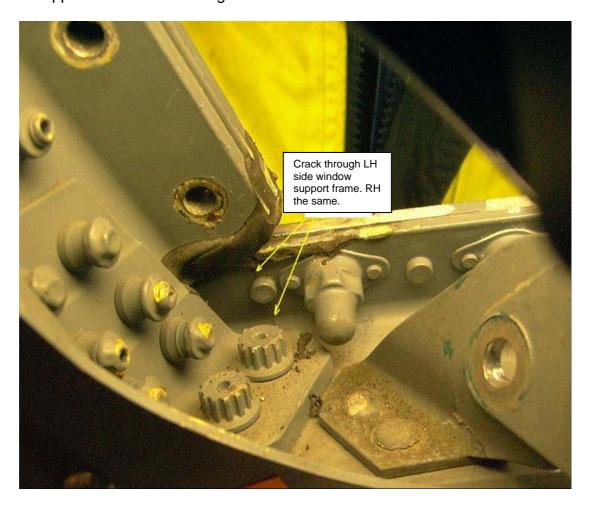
Cockpit window lower support frame cracked from rivets on LH and RH sides.
